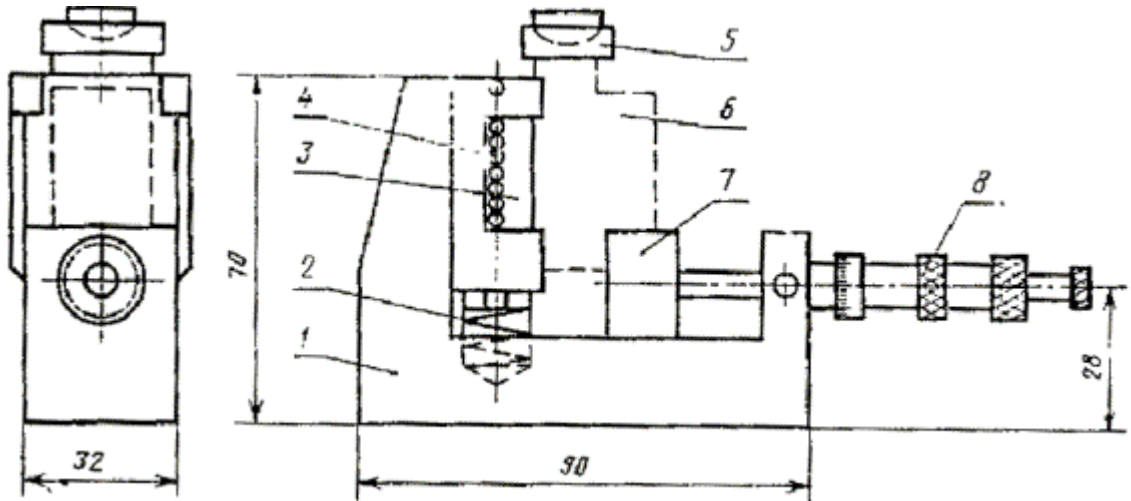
Shearing test machine: 1 – body frame; 2 – spring; 3 - movable plate; 4 – rollers; 5 - push prism with a pin-bearing support; 6 –sample; 7 - movable support; 8 - a device for a mobile support clamping.
